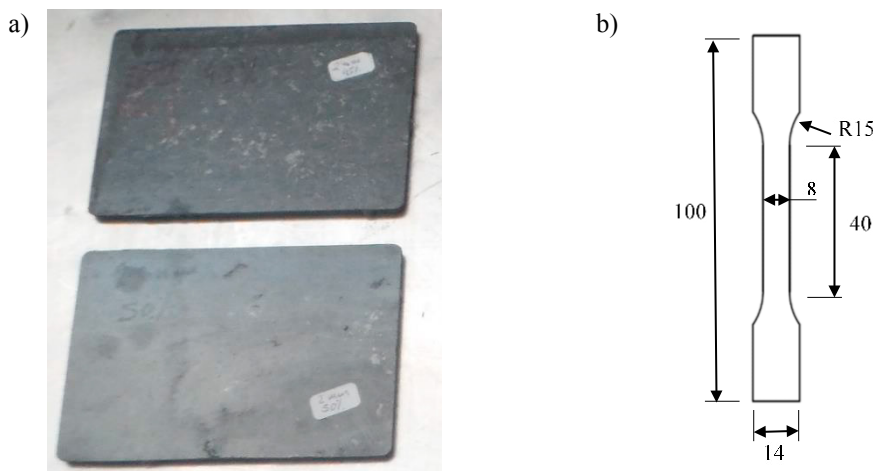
Specimens preparation: a) Molded plate; b) Geometry and dimensions.
